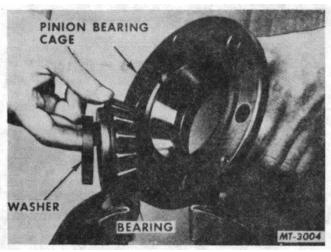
Removal of Pinion Bearing Cone and Washer.
